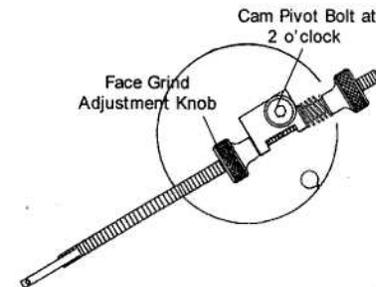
CAM/FACE GRIND KNOB ASSEMBLY.
